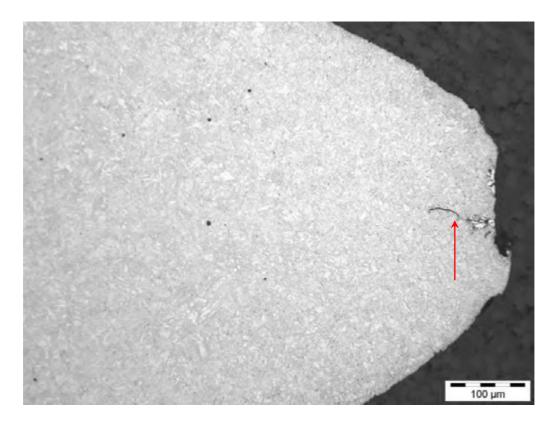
Micrograph (original image captured at X200), specimen etched in Nital. Detail of thread rolling intrusion (arrowed) in shear fractured bolt, which confirmed that the bolt had been thread rolled rather than screw cut and heat treated after threading.
